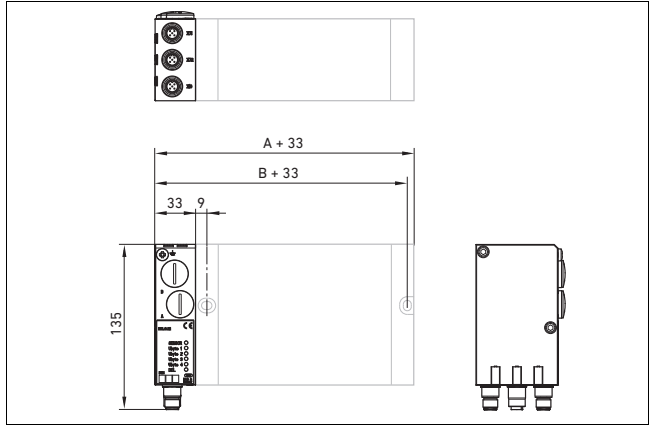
Dimensioned drawing of the valve system (bus coupler and valves)
